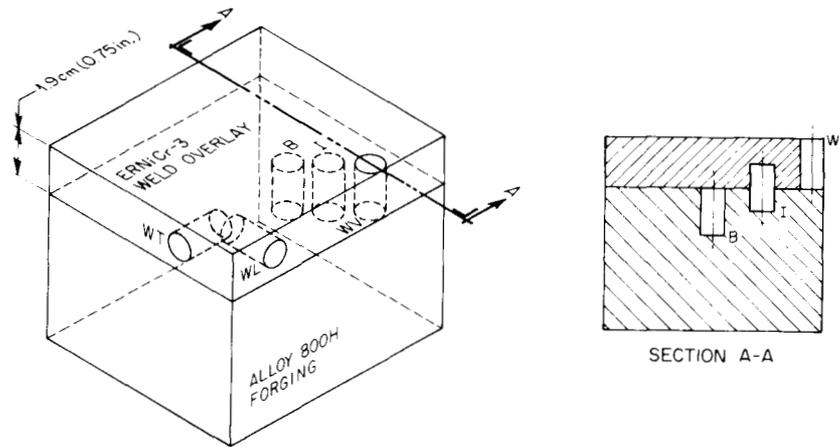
Orientations of test samples from alloy 800H forging with about 19-mm weld overlay of ERNiCr-3. The abbreviations used are more fully described as WT = transverse sample of weld metal, WL = longitudinal sample of weld metal, WV = vertical sample of weld metal, I = sample across weld overlay-base metal interface, and B = sample totally of alloy 800H base metal.
